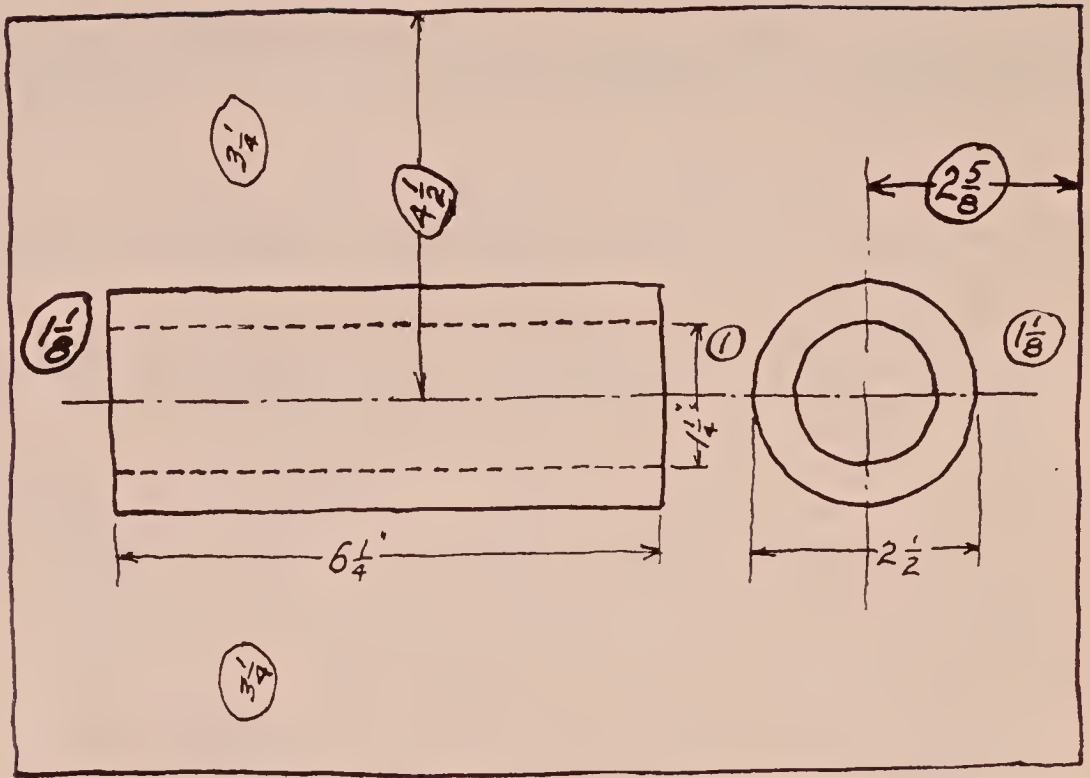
The same sketch showing the amount of spacing and location of center line.
